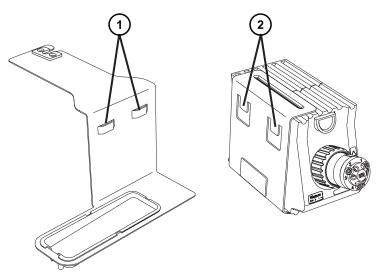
Fitting the ACQUITY diverter valve mounting bracket
